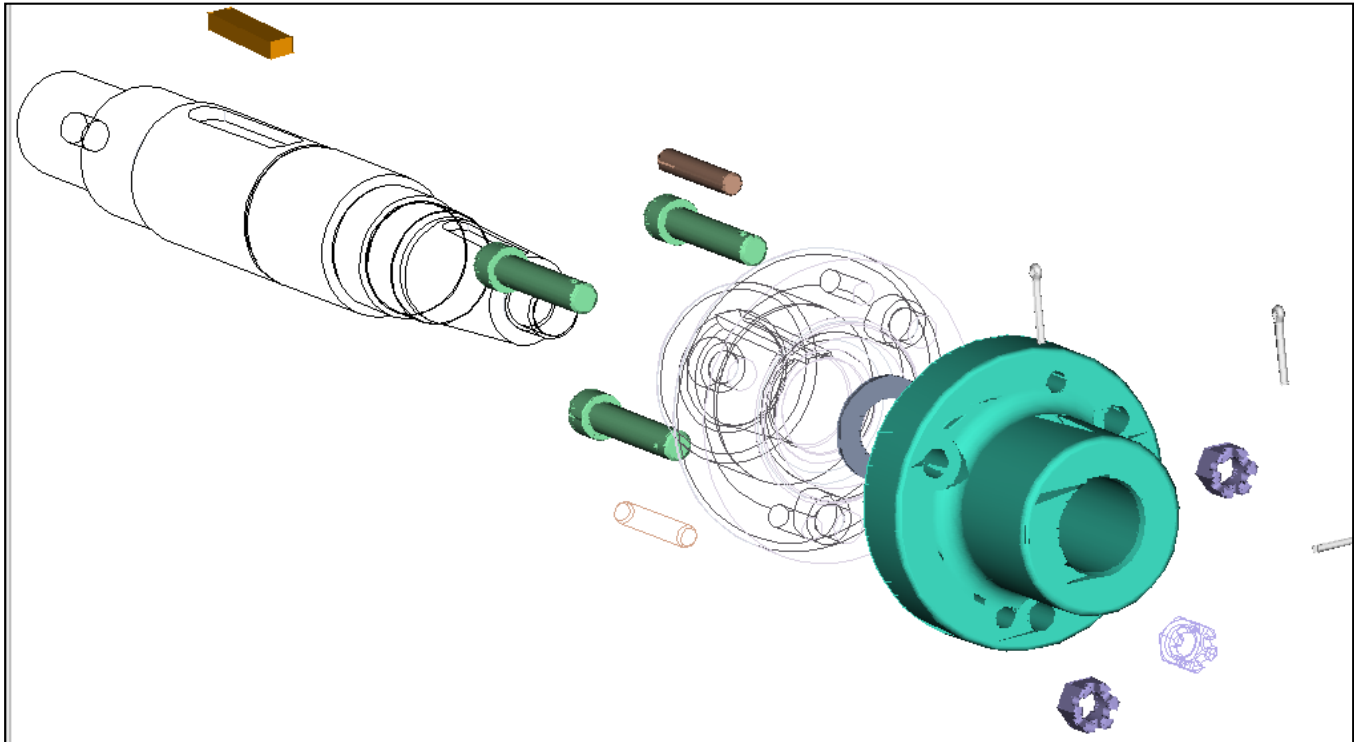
Perspective View of Exploded Coupling Assembly with a Style State showing various Component Display Styles
